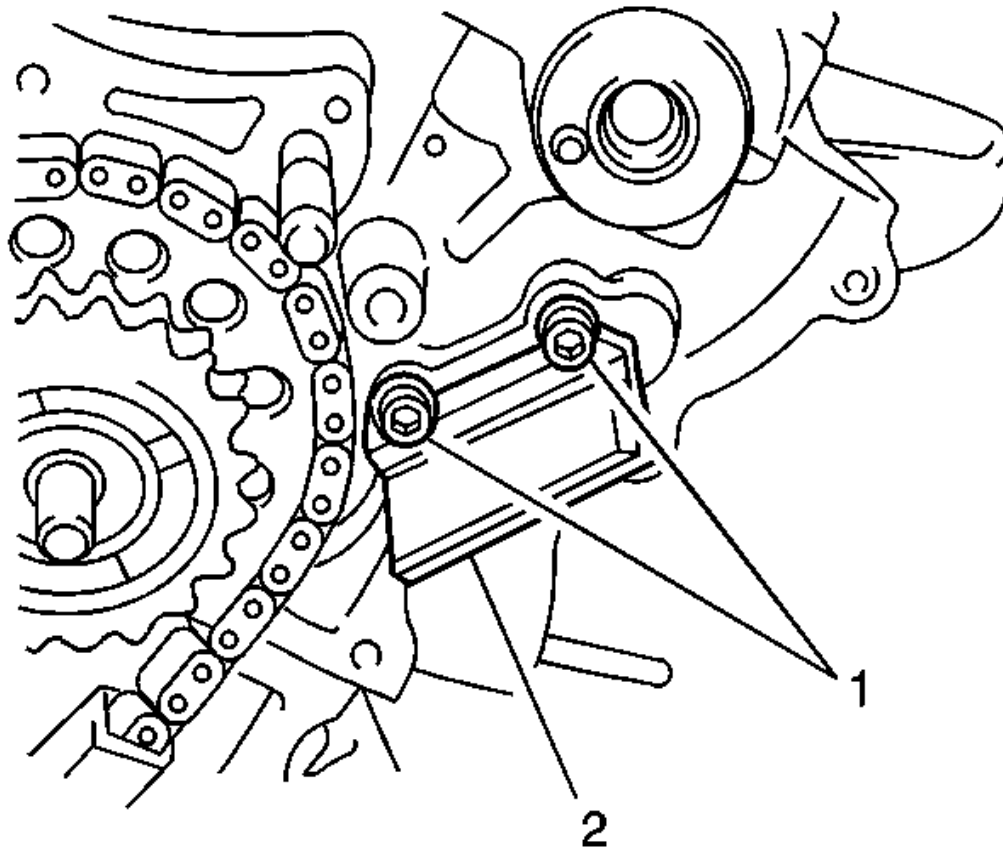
View Of Timing Chain Tensioner & Intake Camshaft
